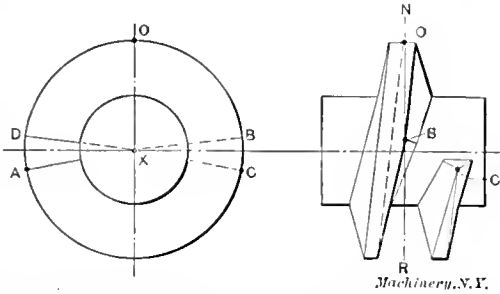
Hob (ungashed) Produced by Combining the Two shown in Fig. 175; the Thread is the same as that shown Developed in Fig. 176.
